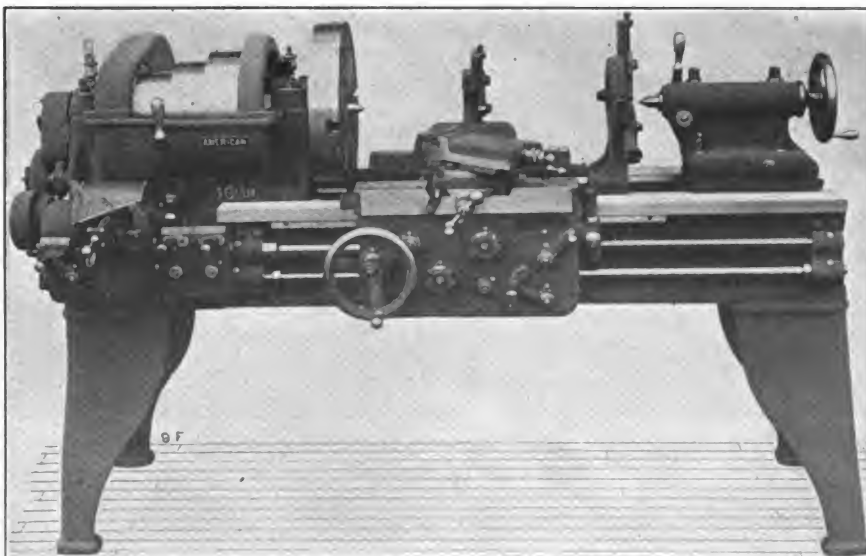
A TYPE USED WIDELY IN GARAGES. THIS TYPE WILL CUT THREADS RANGING FROM 2 TO 112 THREADS
